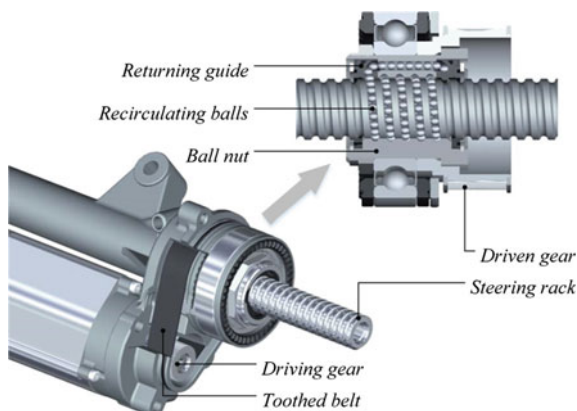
Electric power steering with paraxial drive (EPSapa) [9]
